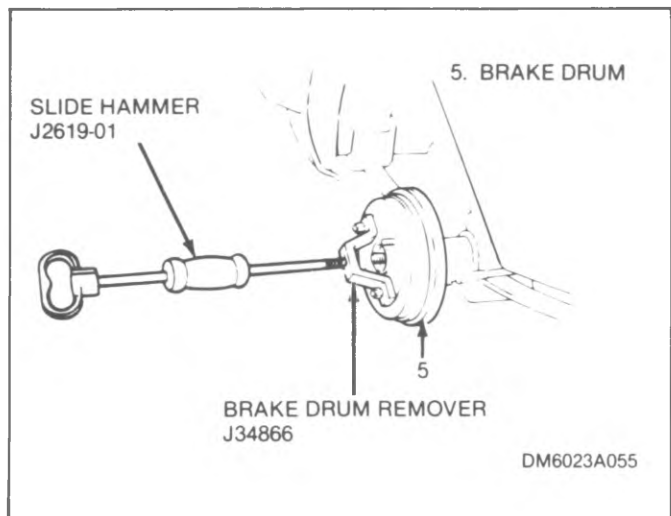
Removing Sprint Brake Drum Using Special Tools
